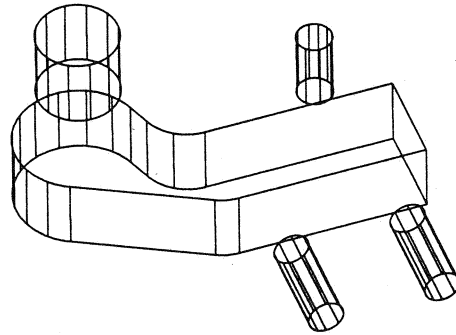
Exploded view of the features making up the reverse engineered steering arm.
